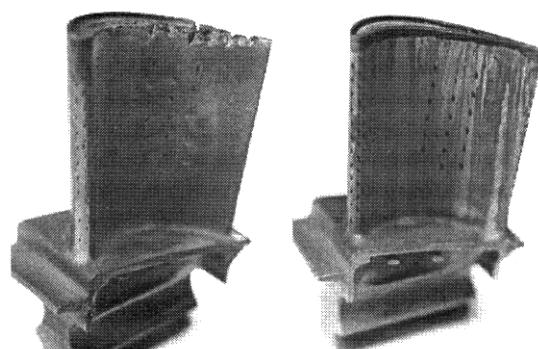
Weld tip repair of DS René 80 first stage turbine blade form CF F404 engine (Courtesy Liburdi Engineering, Hamilton, Ontario)
